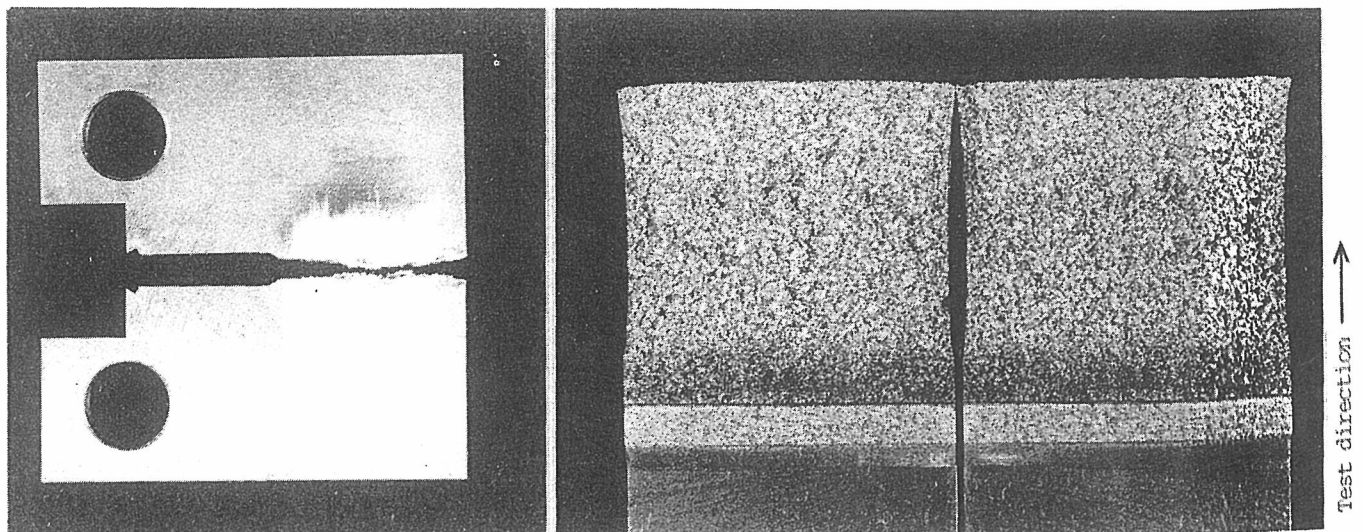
Fracture surface of 1-in. CT specimen for elastic-plastic fracture toughness test; lower layer at position 5.
